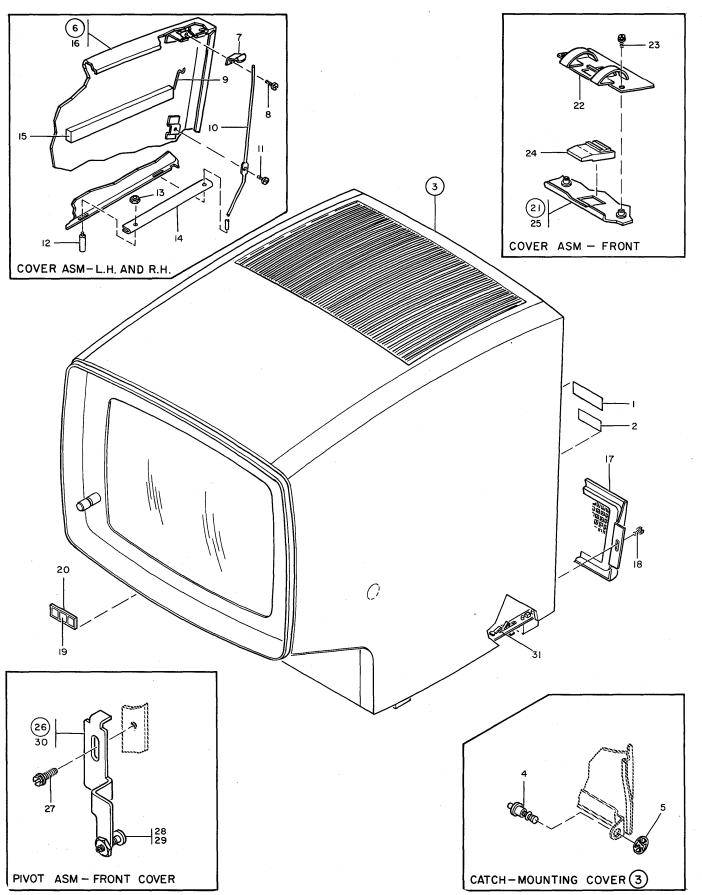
3275 M1/M2 AND 3277 M2 COVER ASSEMBLY.
